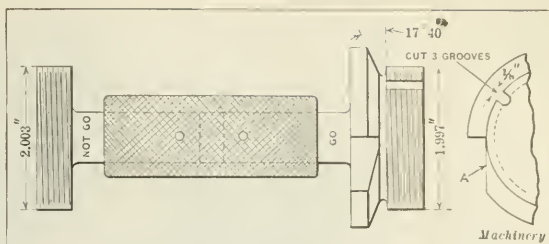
Double-end Limit Plug Gage having Beveled Shoulder for inspecting Chamfered Thread Hole
